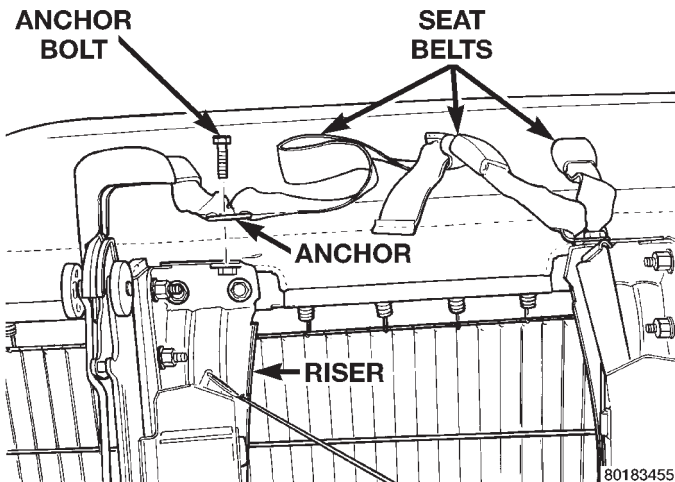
Seat Belt Buckle Second Rear – Three Passenger Bench
